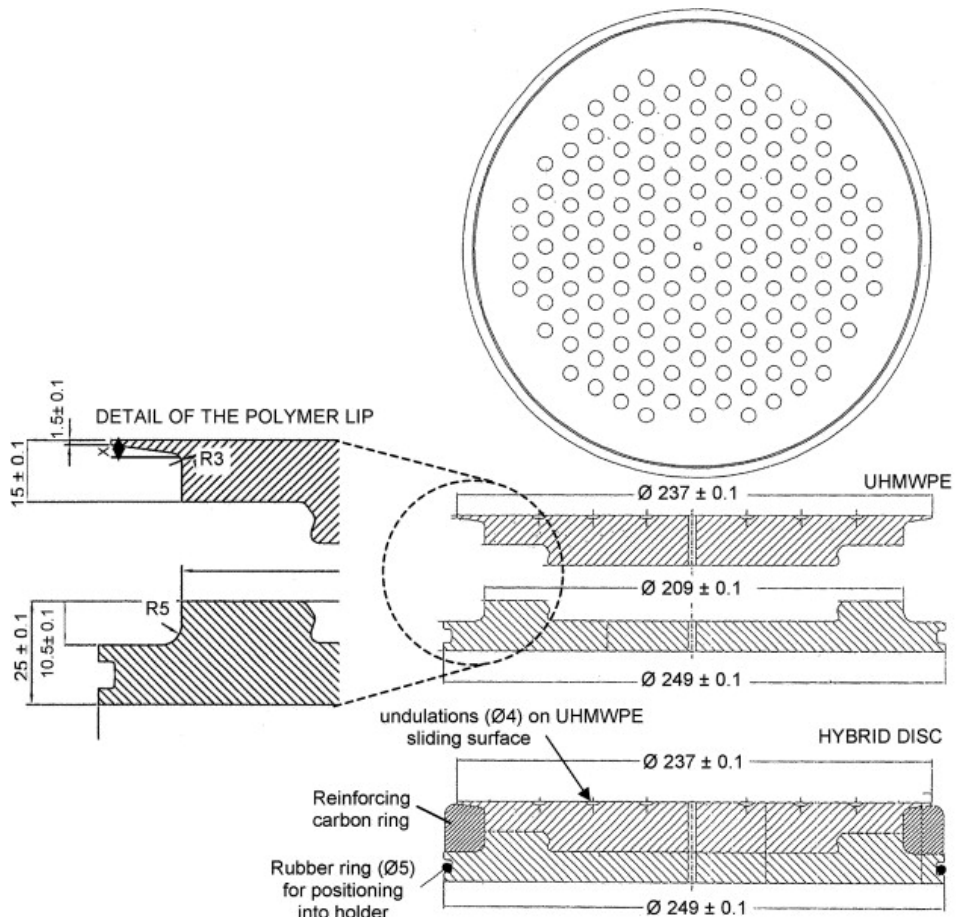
Hybrid sliding pad (Courtesy Solico BV)
